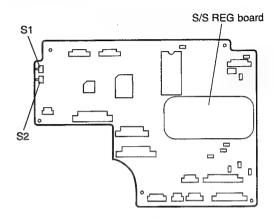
Switch layout diagram inside the S/S REG board
